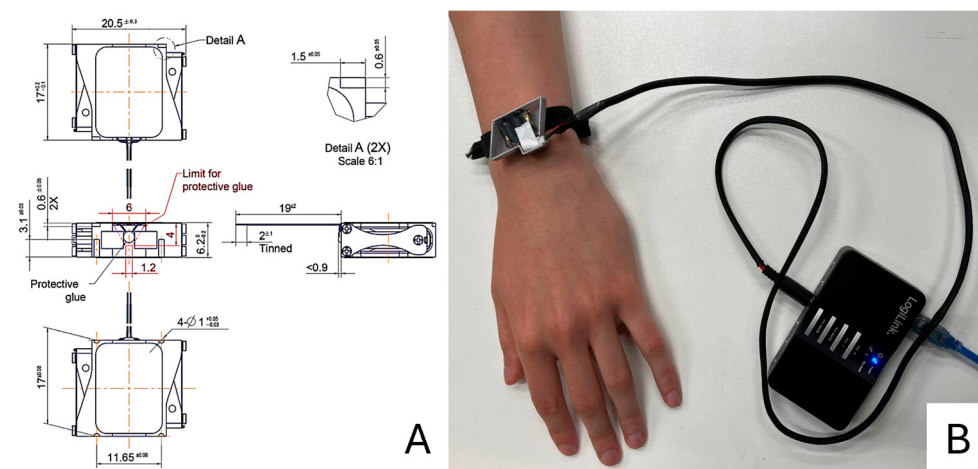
(A) Technical drawing of the Lofelt L5 voice-coil actuator showing external dimensions. (B) Custom-made wearable bracelet with the Lofelt L5 actuator mounted on the wrist, housed in a 3D-printed plastic casing placed flat against the skin and connected to a LogiLink 7.1 channel USB sound box used for stimulus delivery.
